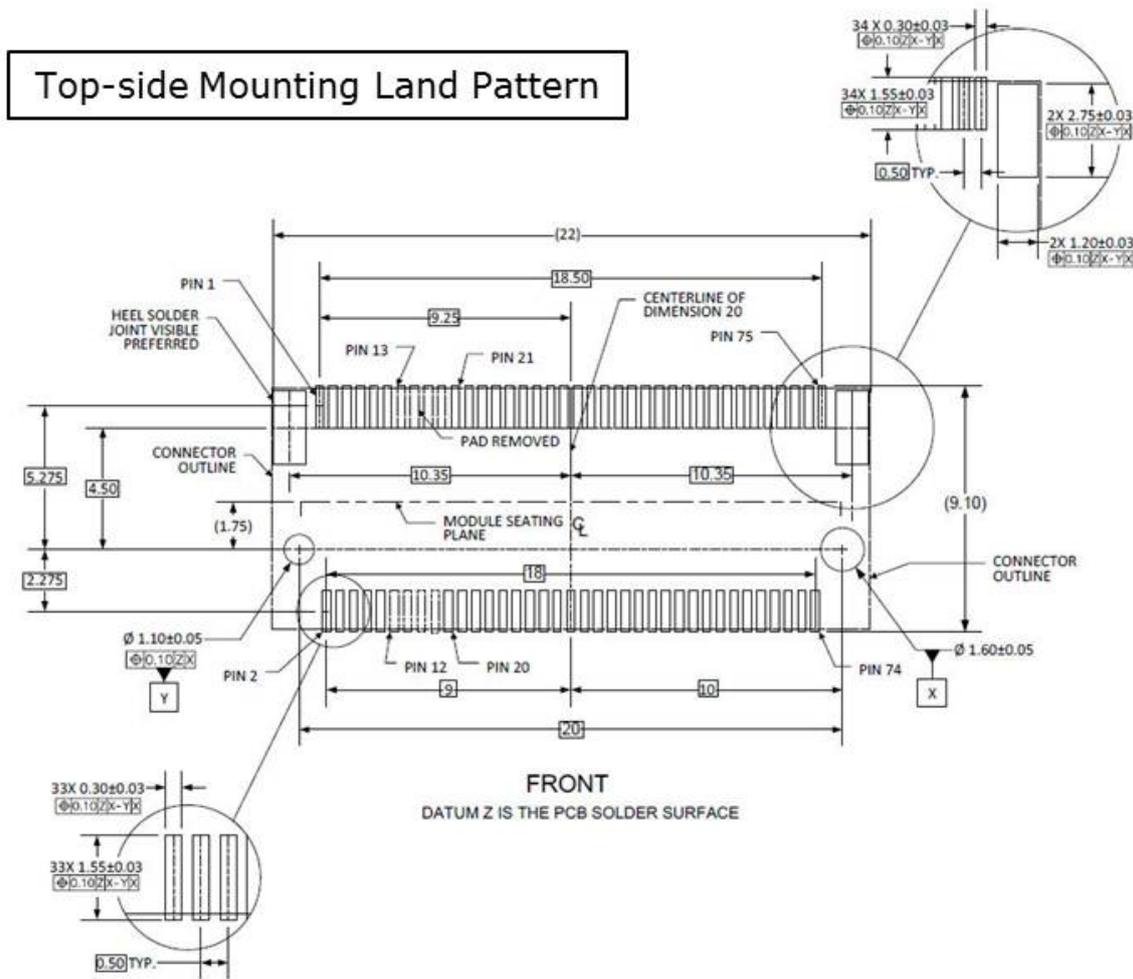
WWAN Card Type 3042 Top-Side Mounting Land Pattern
